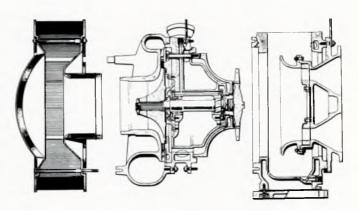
Removal as one assembly of internal components of SA type turboblower
